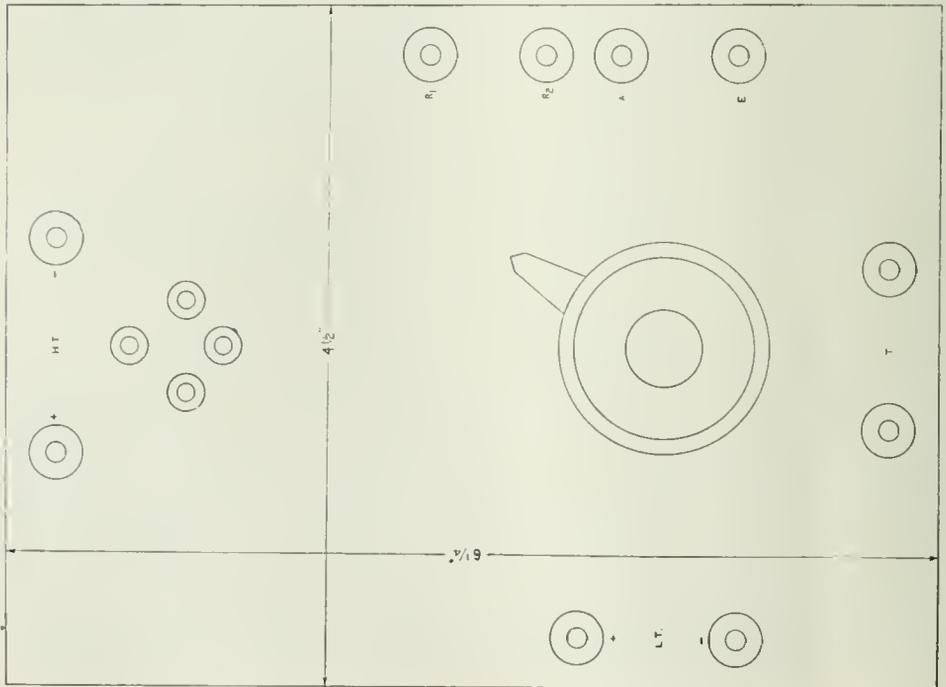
Scale drawing of the top of the panel, showing lay-out of terminals and valve holder. The actual size is  $6\frac{1}{2}'' \times 4\frac{1}{2}''$ .
